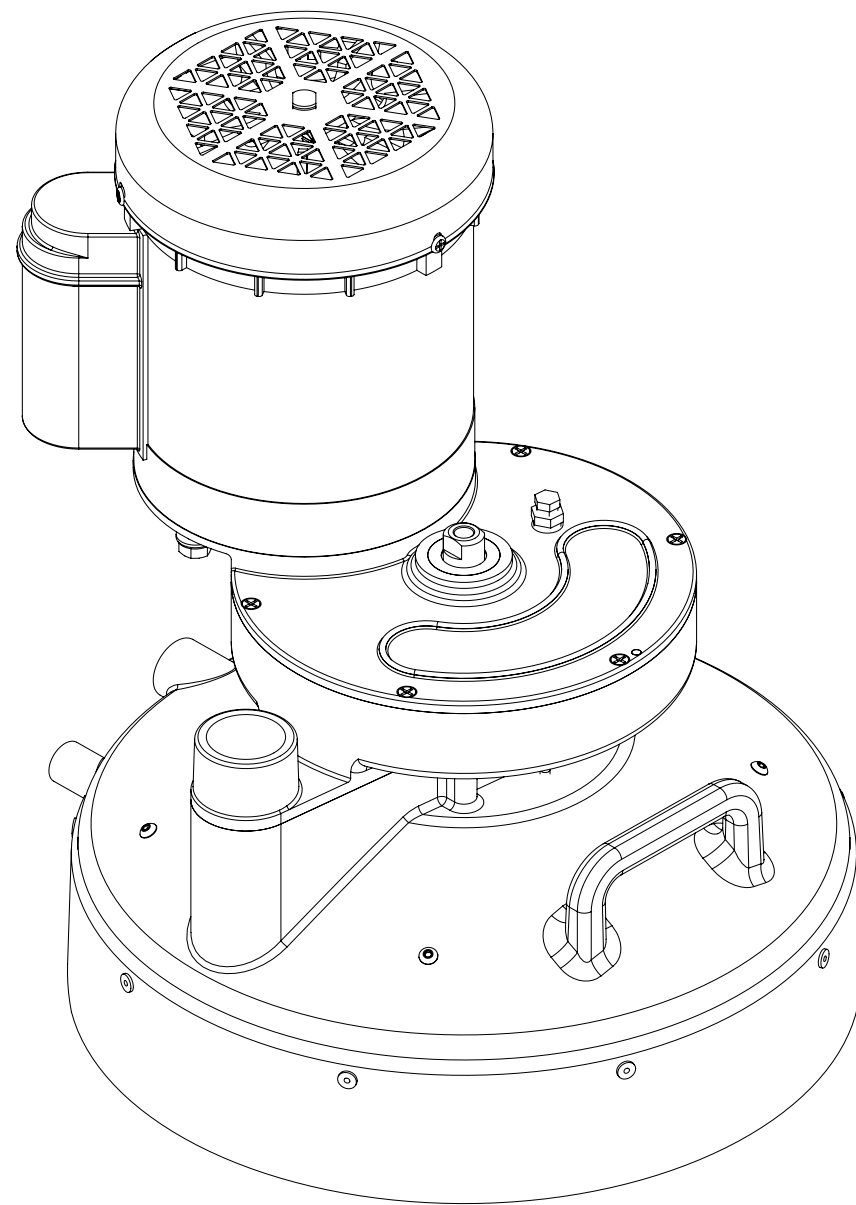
Base and Drive Train Assembly - View 1 of 2
